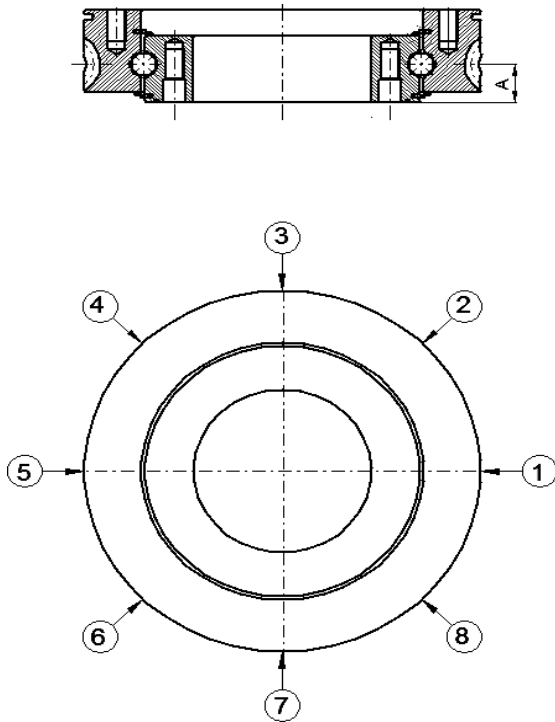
Measurement diagram of globoid gearing against the clamping face of the assembled bearing
